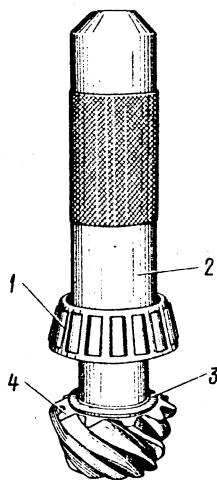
Installing the Rear Bearing Inner Race on Drive Pinion:
